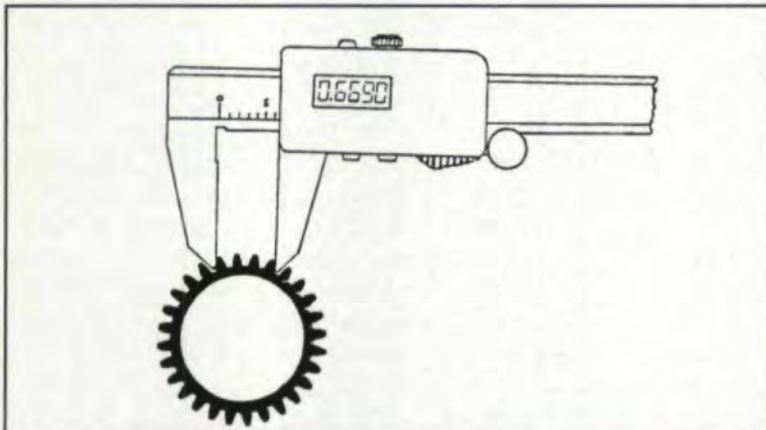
A digital caliper measuring the span over 4 teeth on a 28-tooth gear. Reads to nearest .0005 inches.
